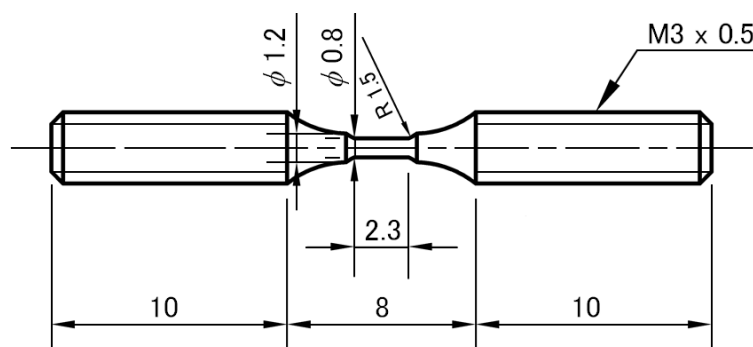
Shape of the tensile specimens. (Unit: mm)
